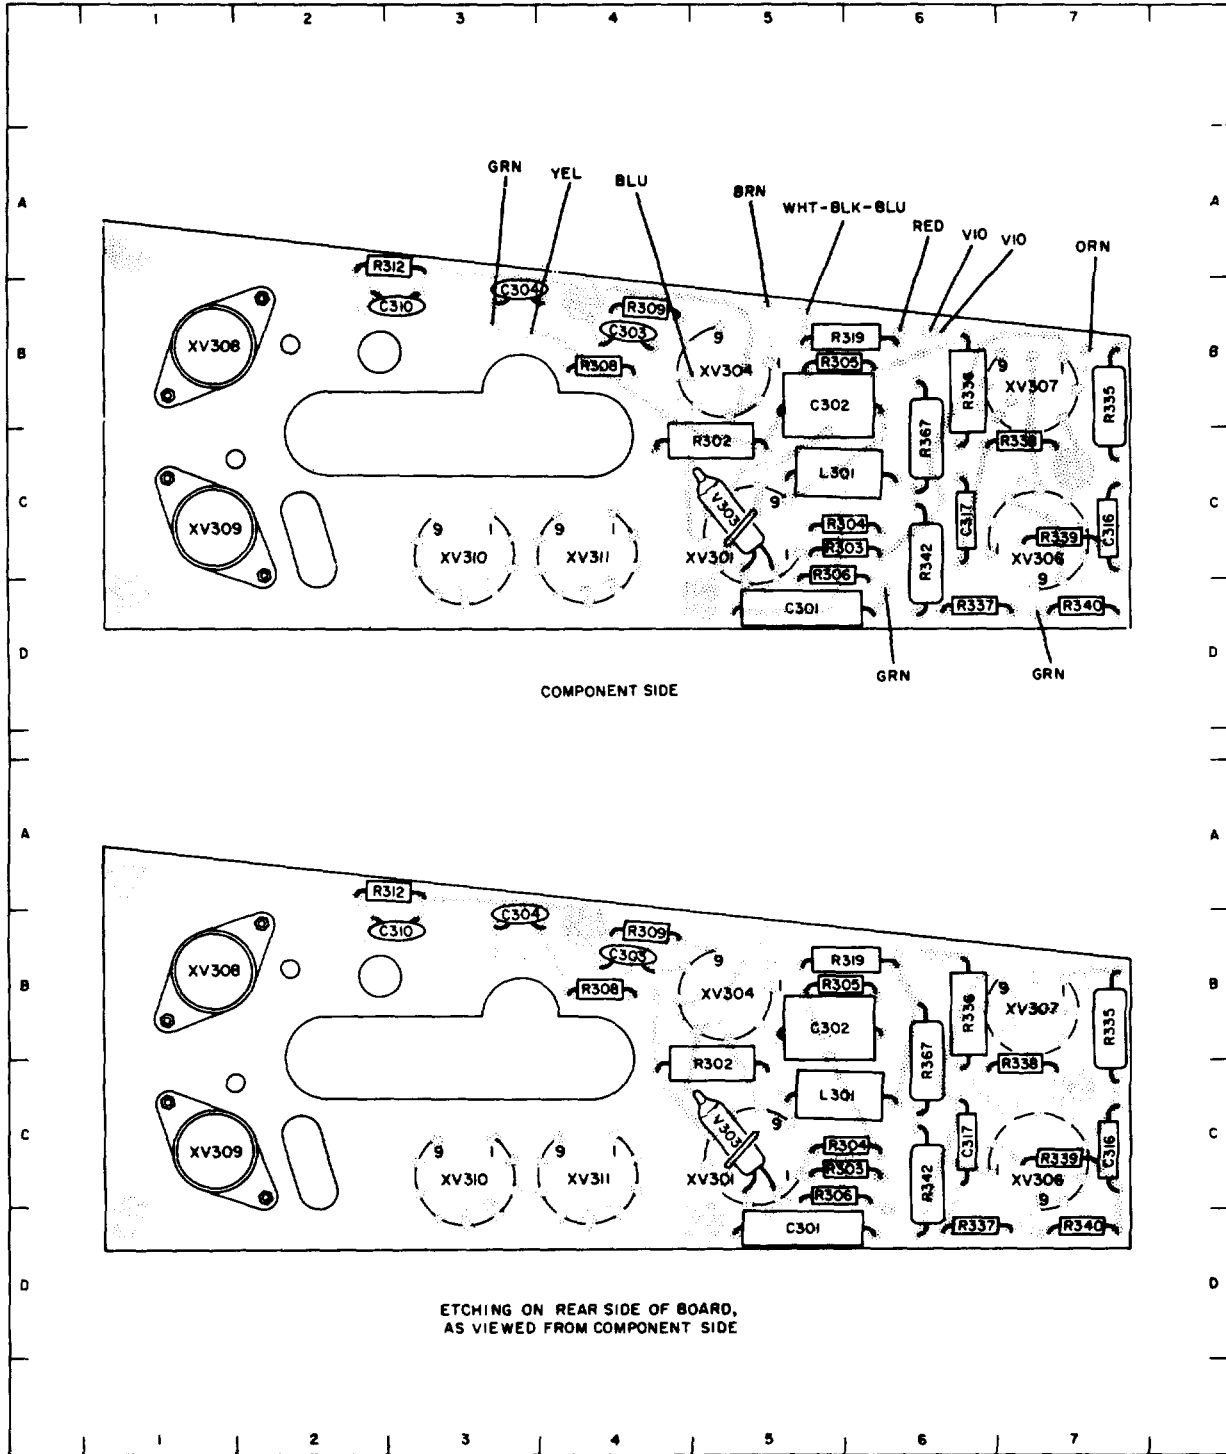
High-Voltage Power Supply Etched Circuit Assembly, Location of Parts
